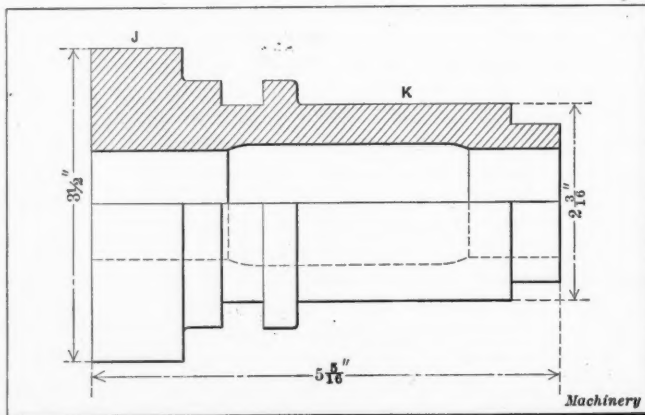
Part turned, bored and recessed by Tool Equipment shown in Figs. 1 and 2
